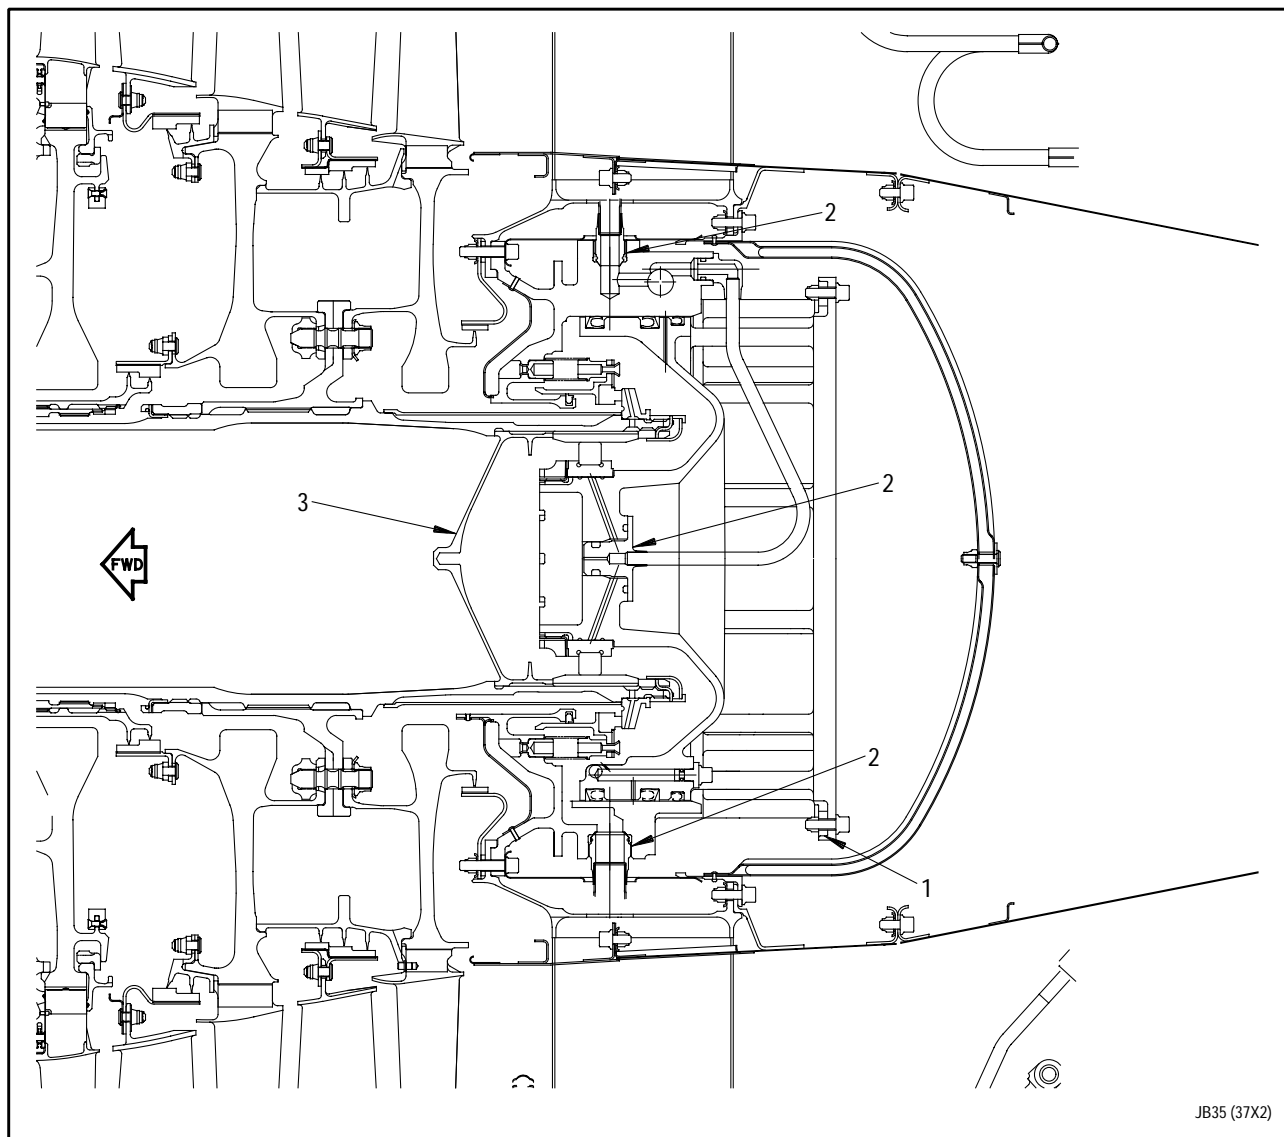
No. 2 and 3 Bearing Compartment - Inspection
